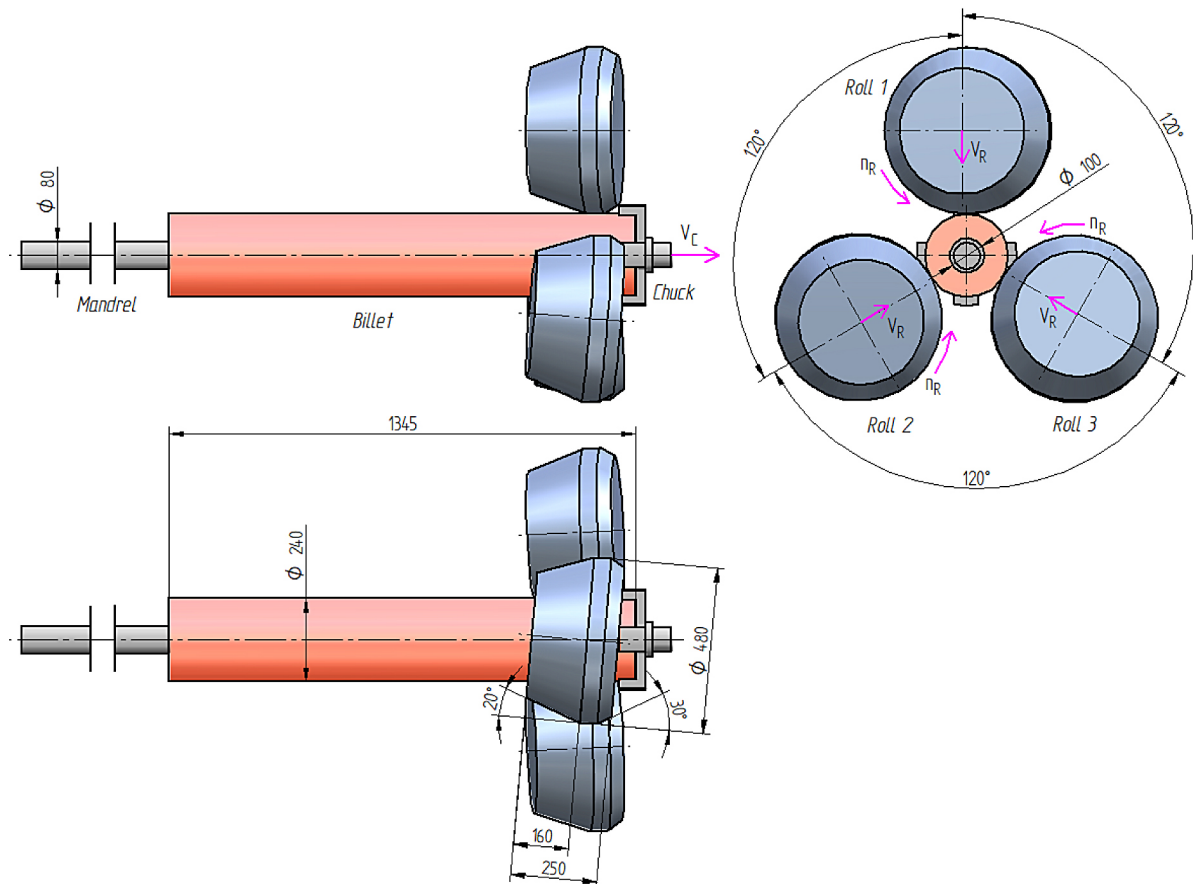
Scheme of the process of skew rolling with a mandrel of a hollow axle; important dimensions given
